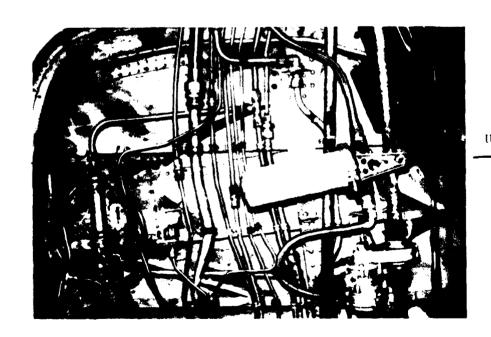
LEFT HAND LANDING GEAR WHEEL WELL-FS820 BULKHEAD - TRACING WEB GRACK
